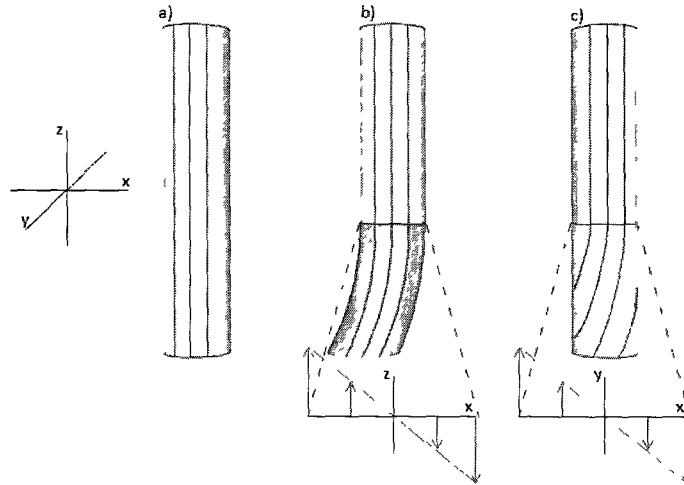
Undeformed tool (a), tool exhibiting bending stress (b), and tool exhibiting torsional stress (c)
